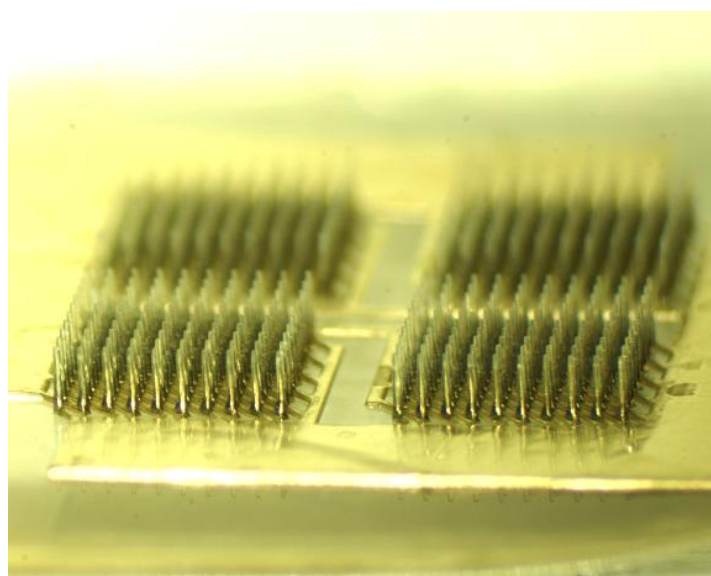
Metal transfer molded MEA with checkerboard pattern electrical connection
